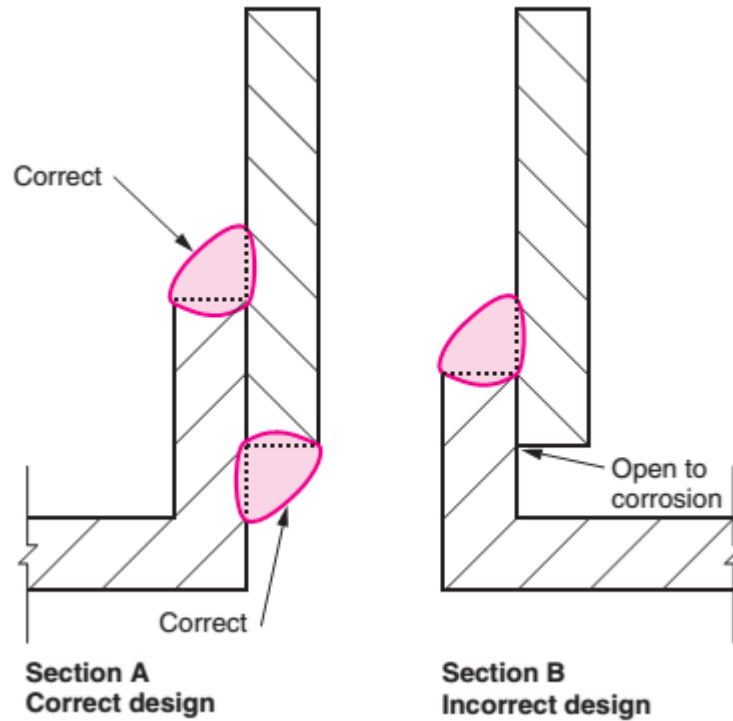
Corrosive liquid must not be allowed to enter the penetration side of weld joint
